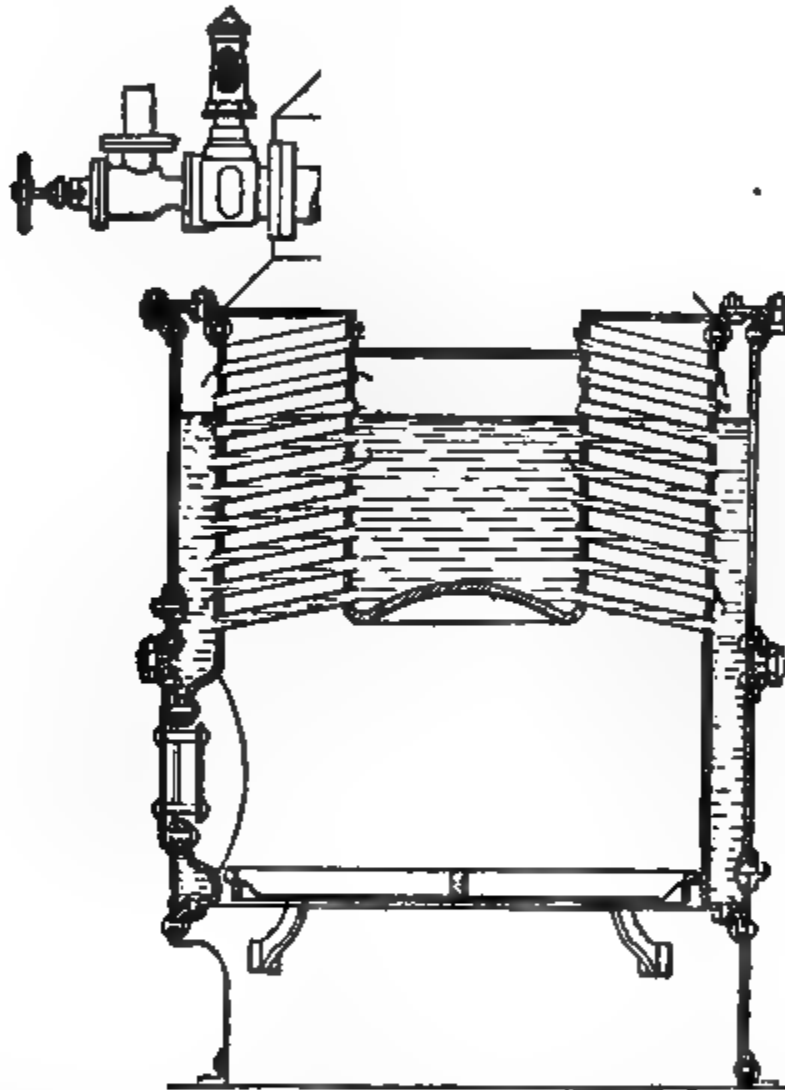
One form of the De Dion Tubular Boiler. It consists of an outside annular chamber, forming a waterleg and connected by numerous inclined tubes to the inner steam and water chamber. A partition across this inner chamber secures dry steam for the engine. Steam connections at the top.
